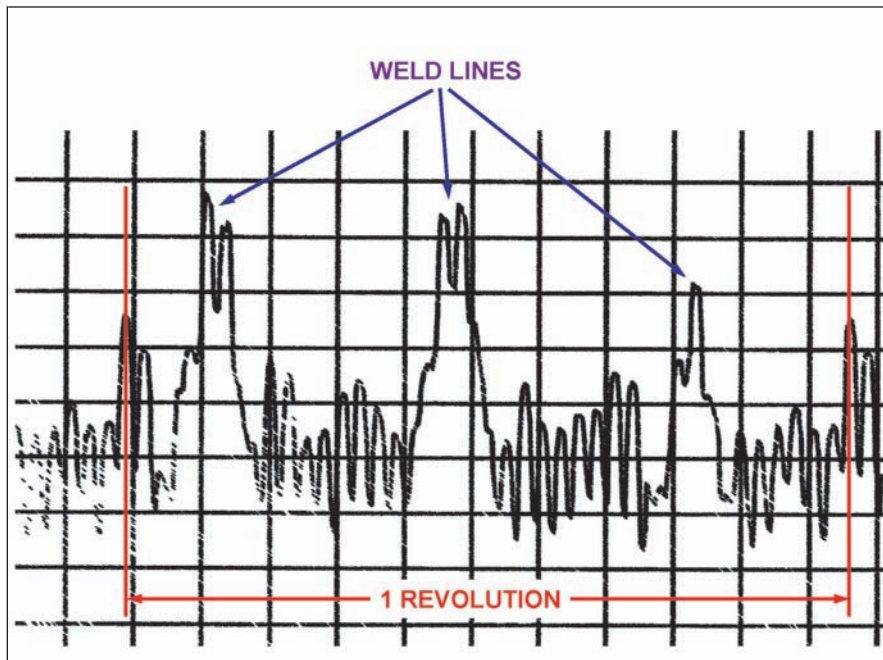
Double-flank roll checker composite measurement showing effect of three symmetrical, radial-weld lines (the three highest peaks) on a glass-reinforced gear.
